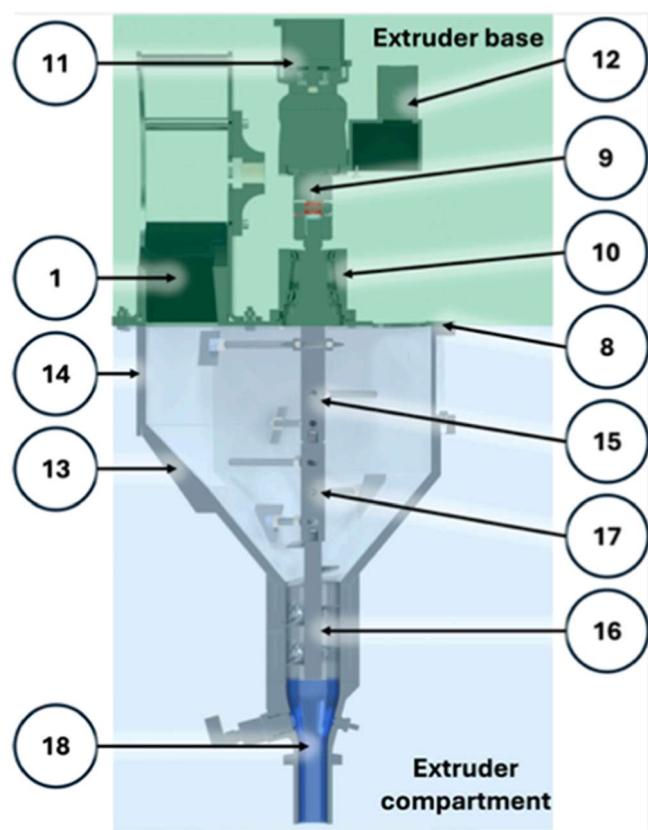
Cross-section of the extrusion section with interface (7), base plate (8), bearing sleeve (9), motor-shaft coupling (10), extrusion motor (11), laser-distance sensor (12), main conical housing (13), buffer-enhancing housing (14), main shaft (15), screw shaft (16), buffer shaft module (17), nozzle with pressure- and temperature sensor (18).
